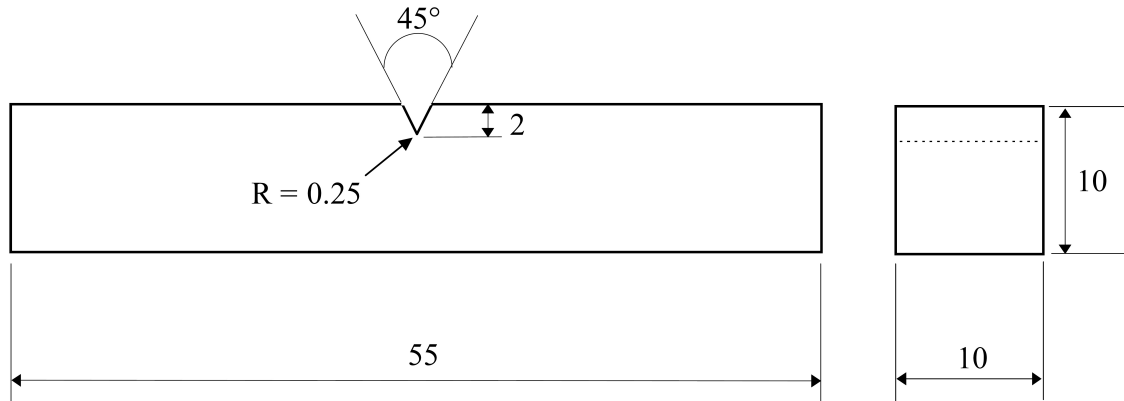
Dimensions of the Charpy specimens, given in mm. [?] ]
